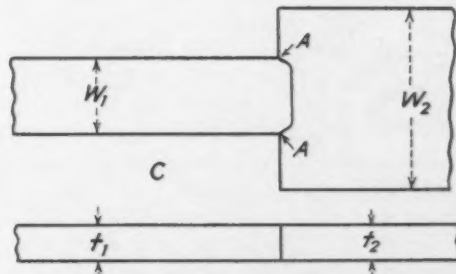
Maximum sectional unbalance of joint designs for flash-butt welding.
